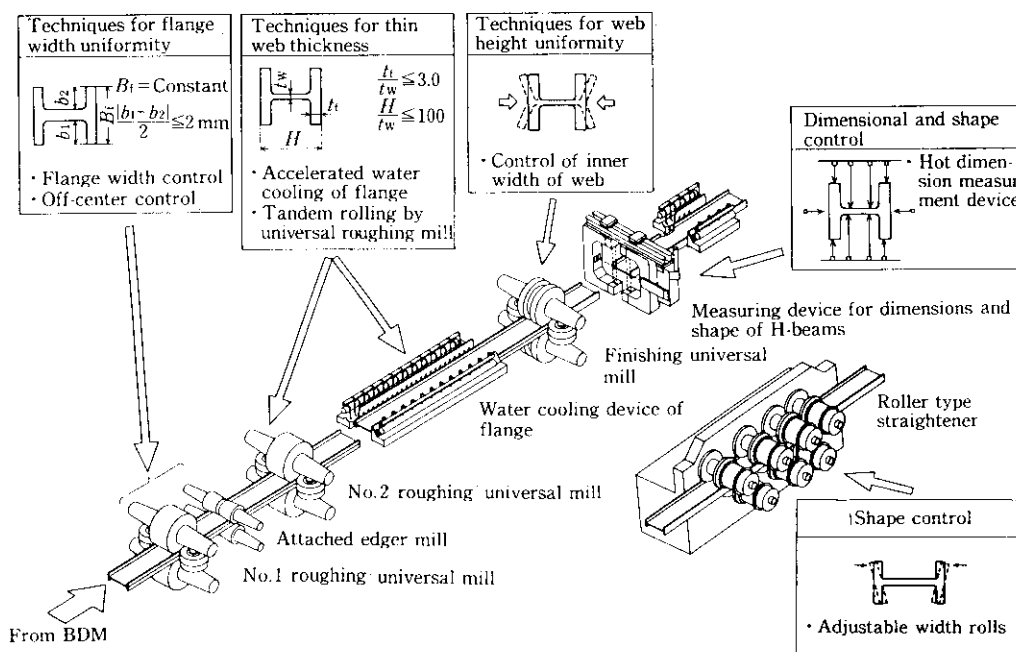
Production process for fixed outer dimension H-shape and technical subject
